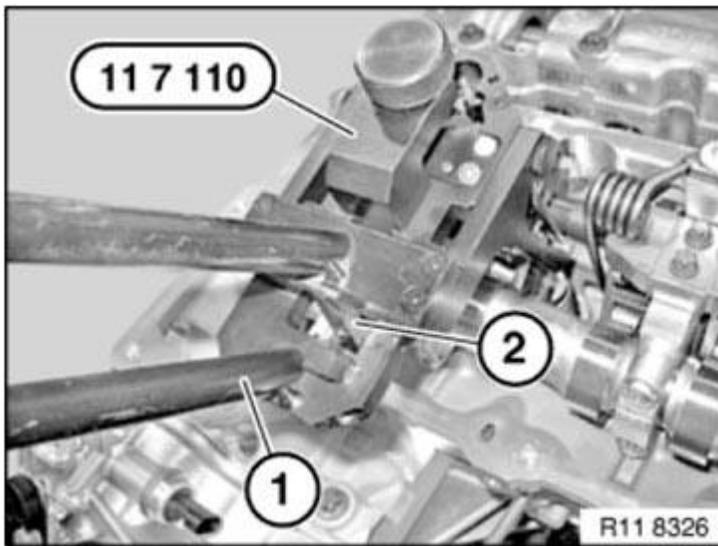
Identifying Latching Hook, Lever With Special Tool 11 7 110
